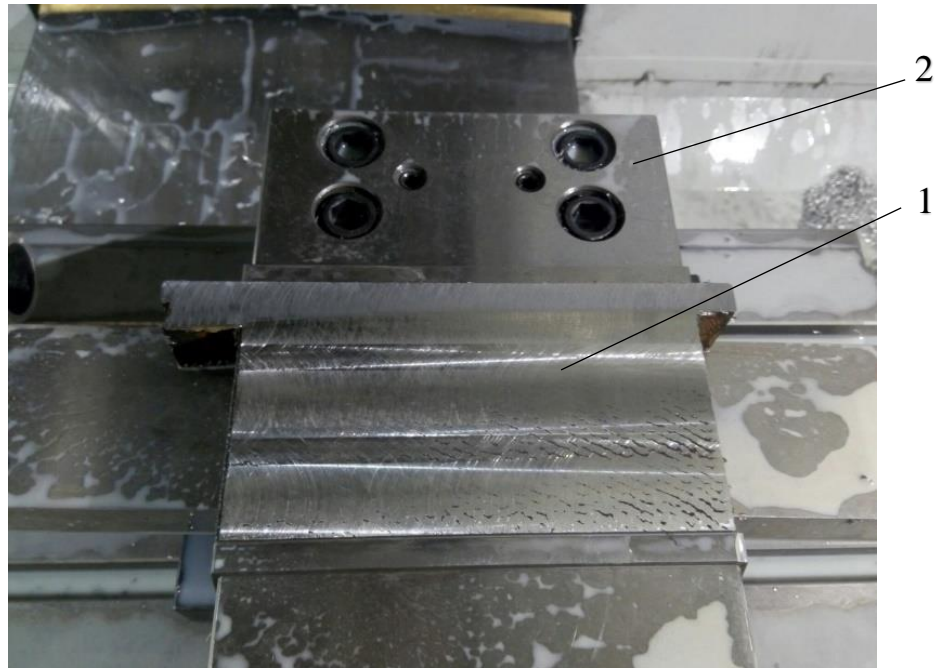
A photo of a nickel alloy blank mounted in a vice on a milling machine. 1 - preparation;
